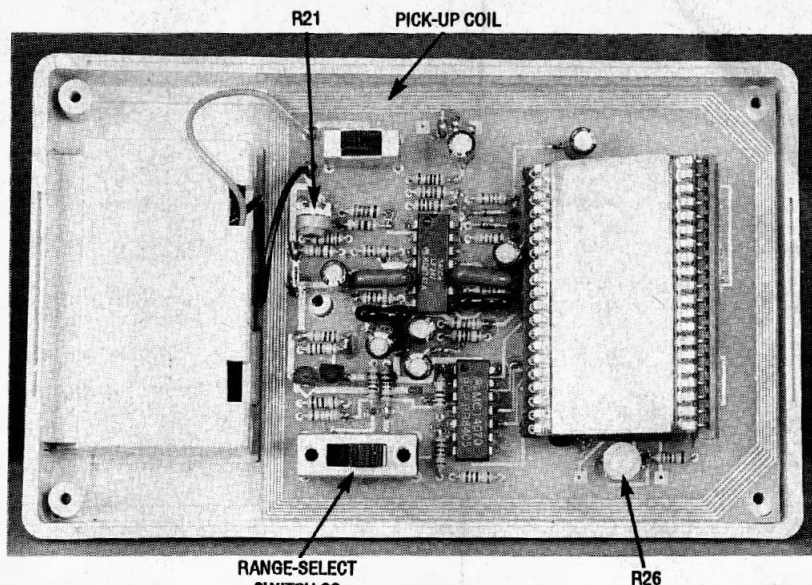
THIS IS AN INTERNAL VIEW of the magnetic field meter. Assembly is easy, just install all components below the LCD first.
